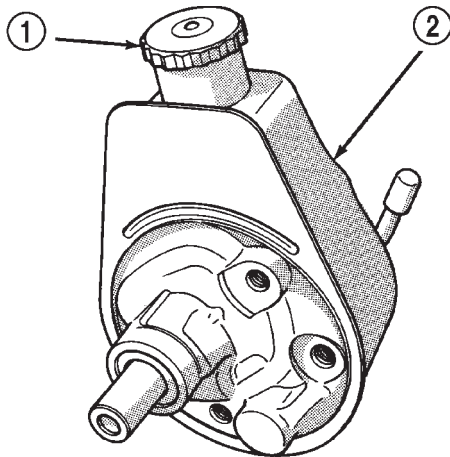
Power Steering Pump - 3.9L & 5.9L RH13
